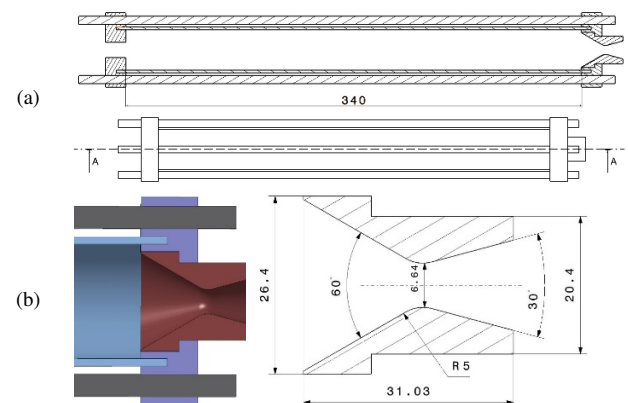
Rocket motor overall dimensions: (a) section drawing, (b) nozzle.
